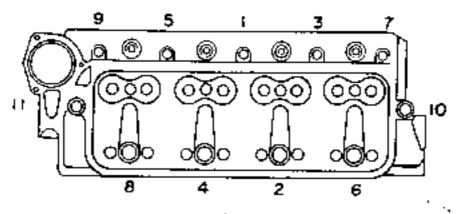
The Order of Tighting the Cylinder Head Nuts
